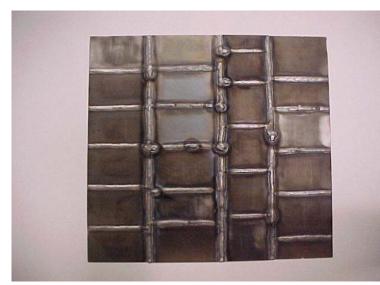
Gadolinium plate fabricated by welding together 3.18 mm thick slabs. The weld bead facing the plasma does not harm the process. The back side, which attaches to the cooling coils is very flat.
